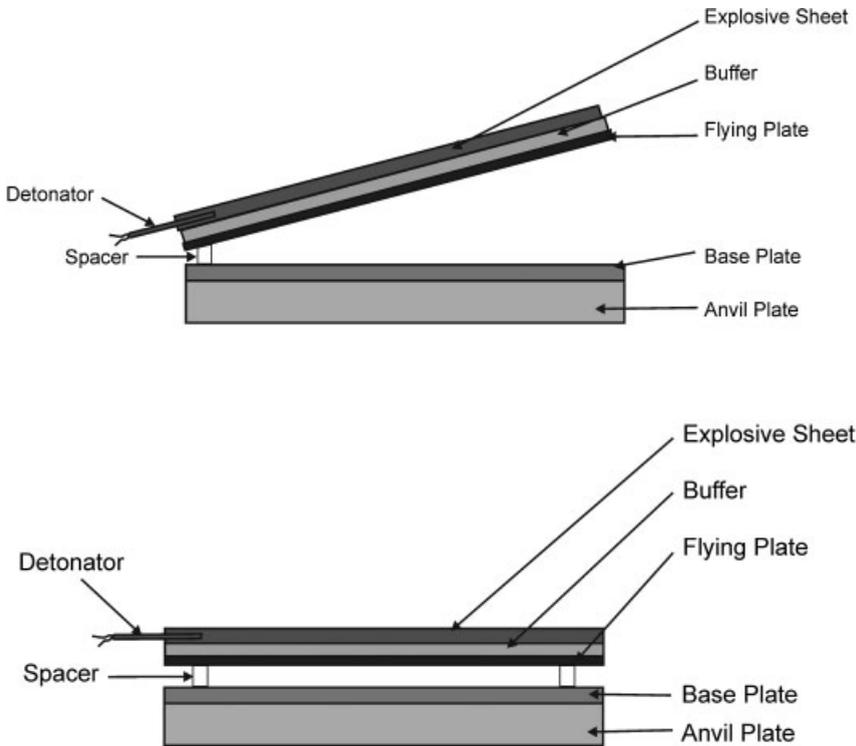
Parallel and angular plate welding set-ups.
